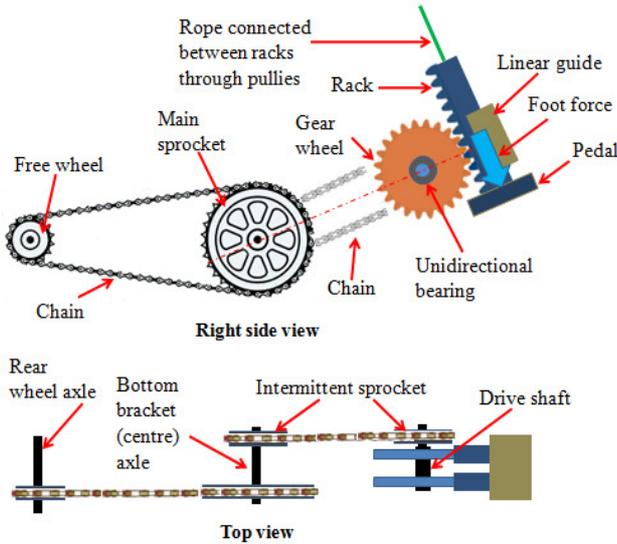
Fig. VI.A. Free return rack and gear mechanism for converting reciprocation of foot into rotary motion of gear box input shaft
